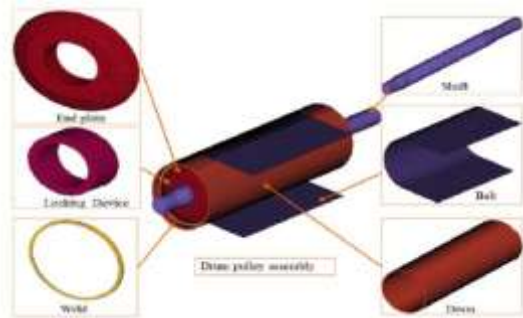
Exploded View of Mashed Drum Pulley Assembly
